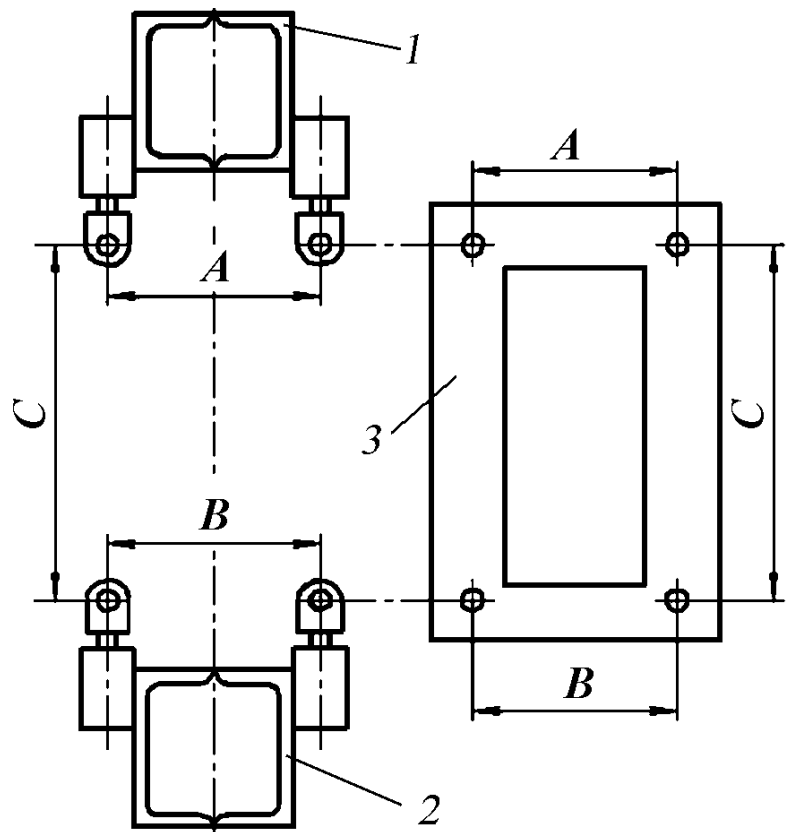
Scheme of assembly jig mounting by CTM: 1 – upper beam; 2 – bottom beam; 3 – mounting plate
